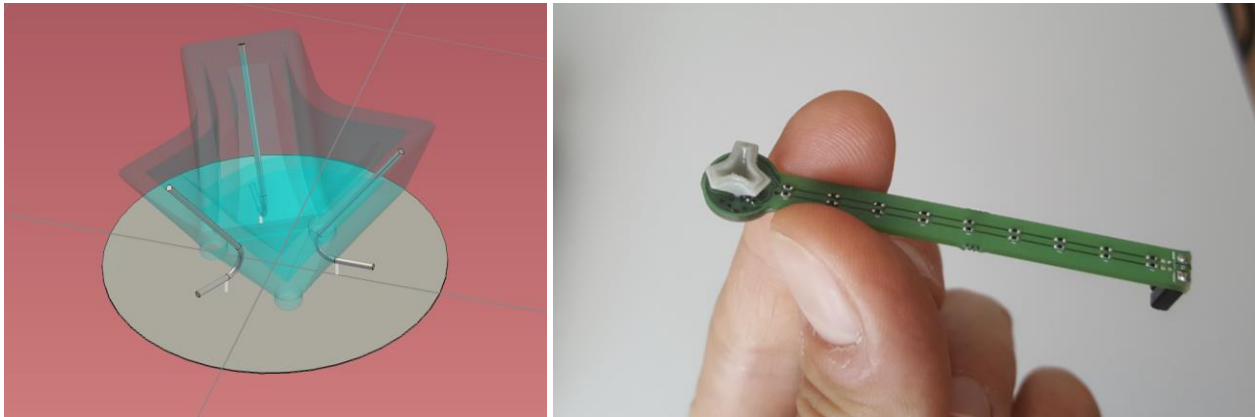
Detector module with a 3-dimensional orthogonal field probe arrangement. CAD drawing of the support and field probe wires (left) and manufactured evaluation prototype on a standard circuit board (right).
